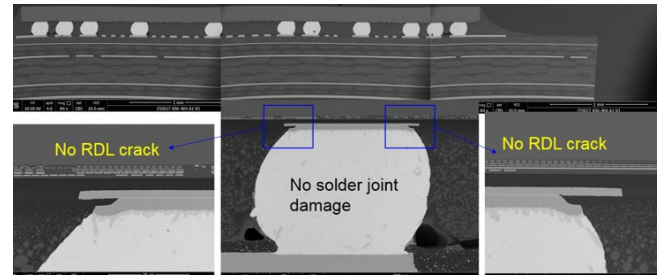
Solder joint and RDL post 1000 cycles of board level stressing.
